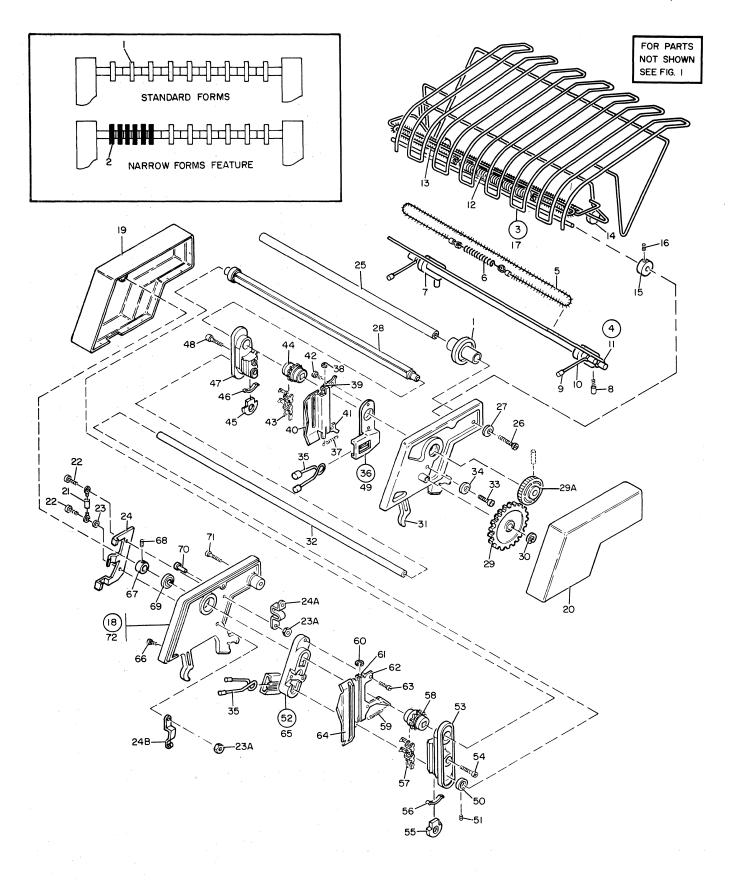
STANDARD AND NARROW FORMS TRACTOR AND GUIDE ASSEMBLY. SEE LIST 4.
